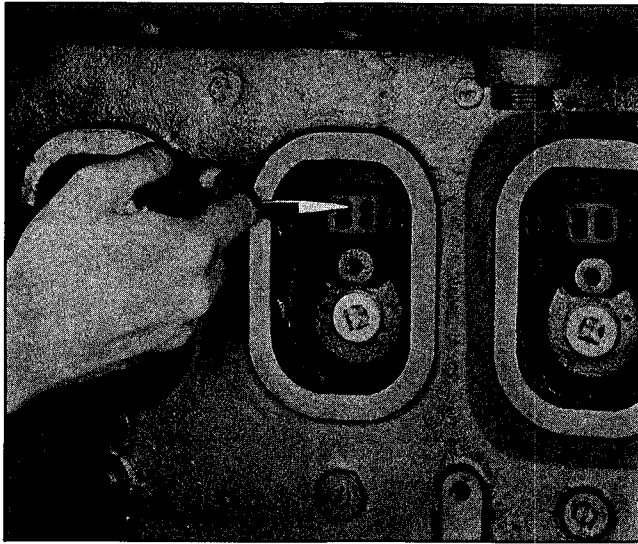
Inspecting for Broken Piston Rings Through Cylinder Liner Air Ports.
